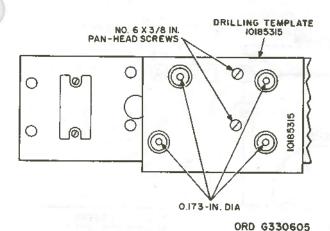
Mounting channel 9156676—partial view showing drilling locations.
